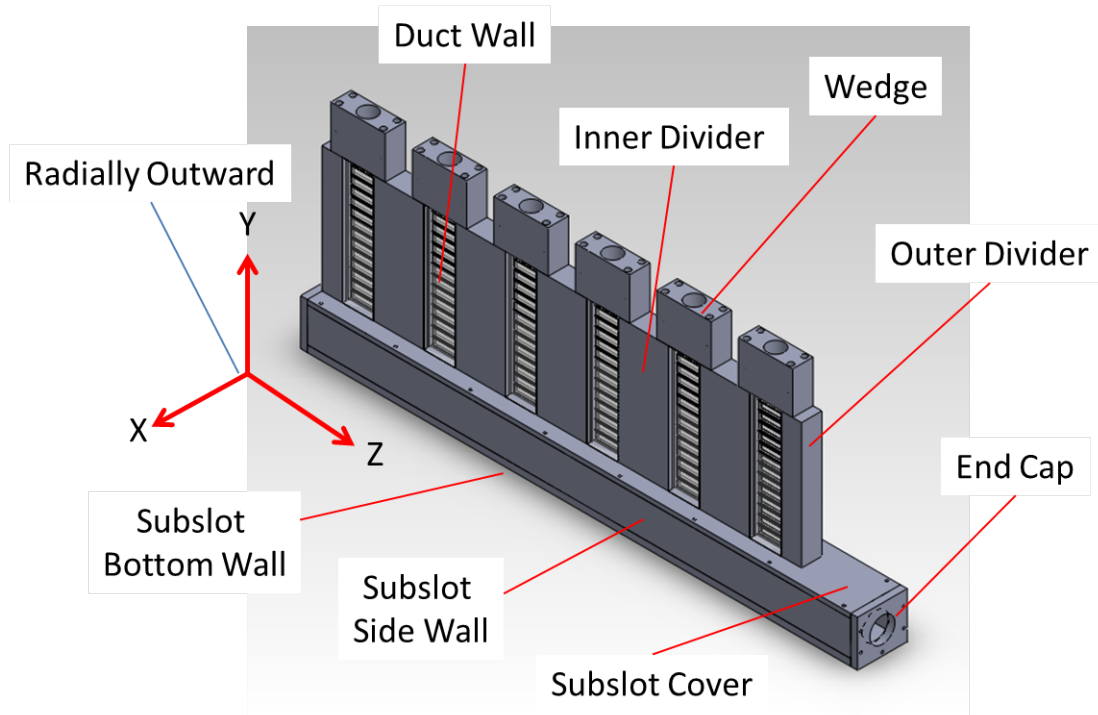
Rotor test section CAD model with cartesian coordinates.
